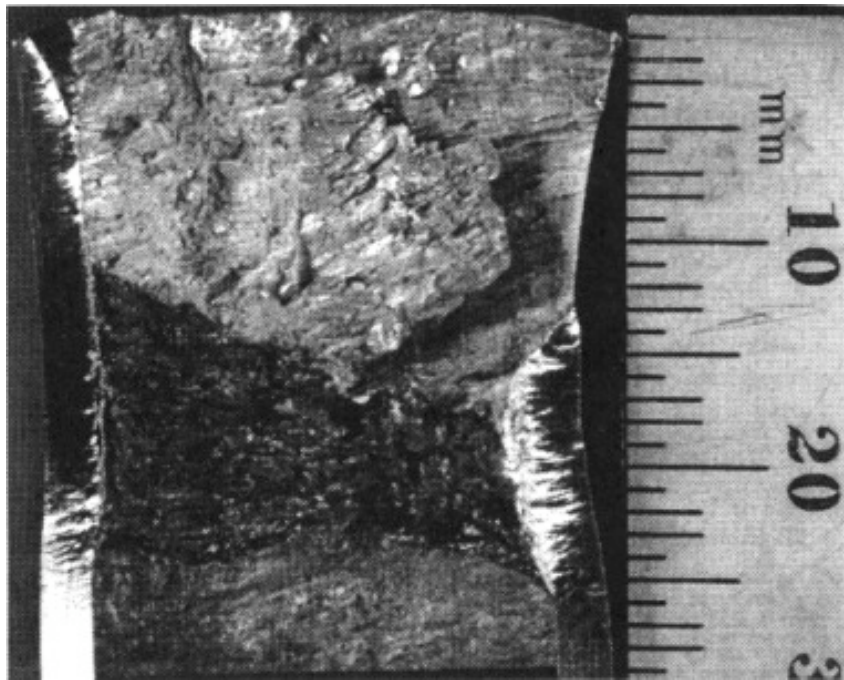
Fracture surface of unaged weld metal PWCE tested at 290°C
